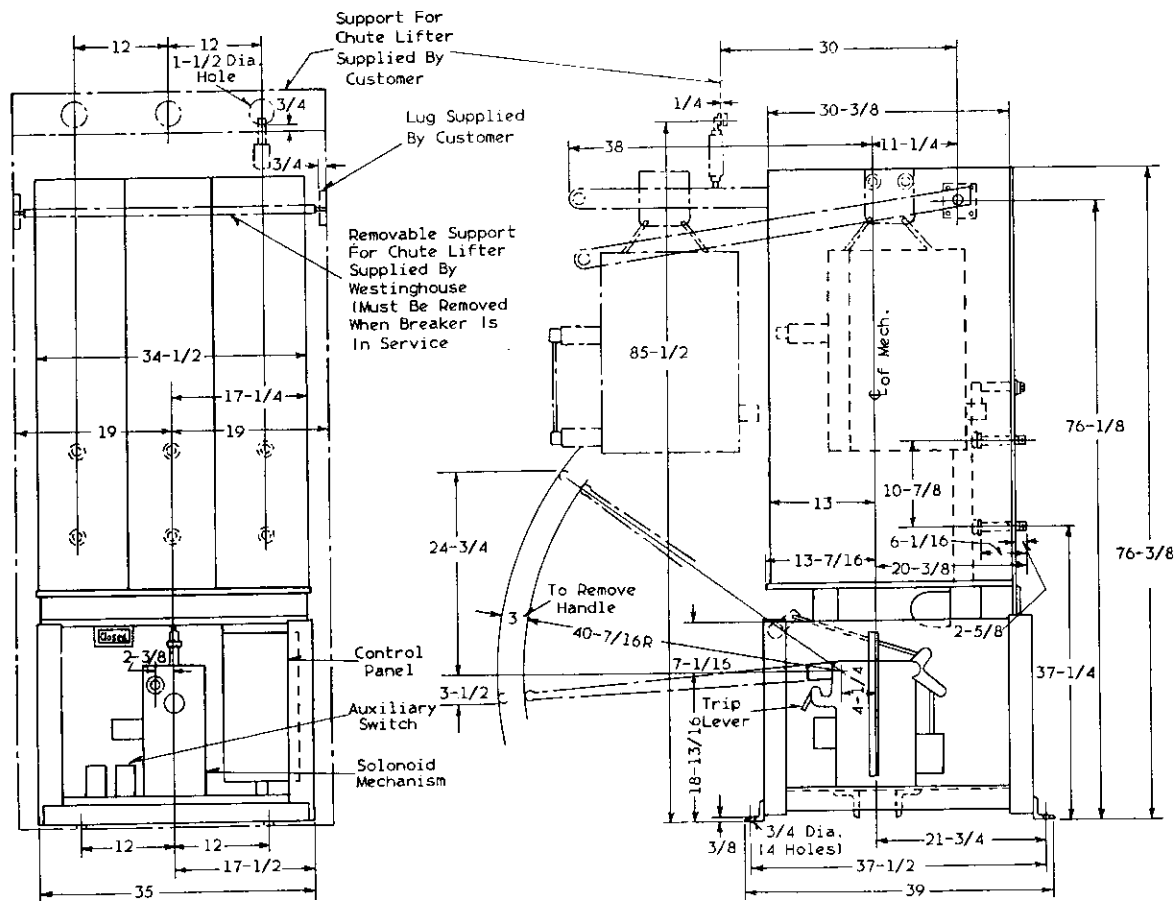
OUTLINE DIMENSIONS OF TYPE 75-U-22, 1200- AND 2000-AMPERE, 3-POLE "DE-ION" AIR CIRCUIT BREAKER
